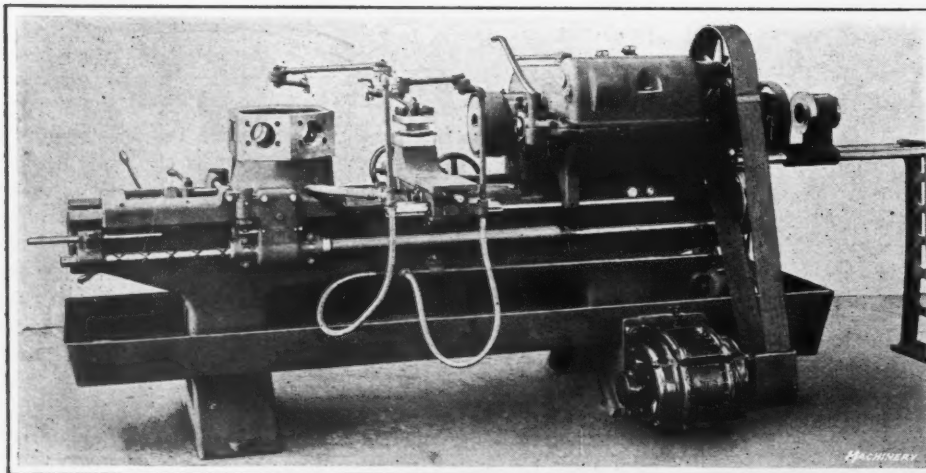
Rear View of Machine, showing Arrangement of Quick-traverse Mechanism
